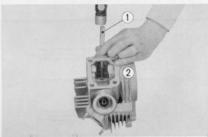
(1) Valve guide driver (2) Cylinder head
